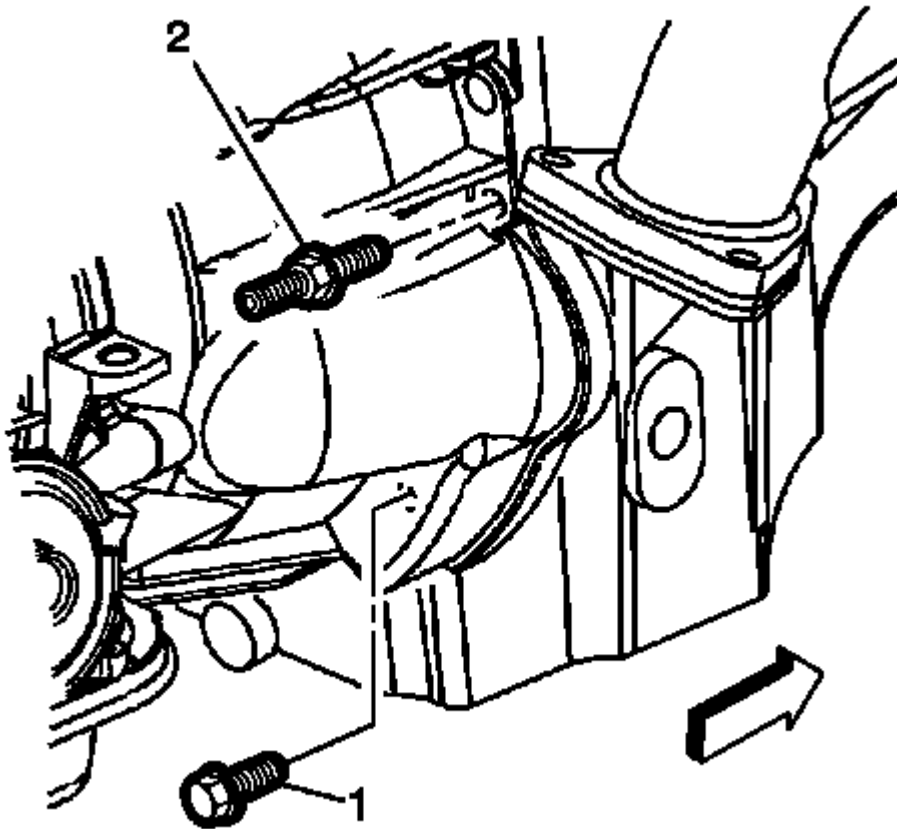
Identifying Stud & Bolt Securing Transmission To Engine (Right Side)
